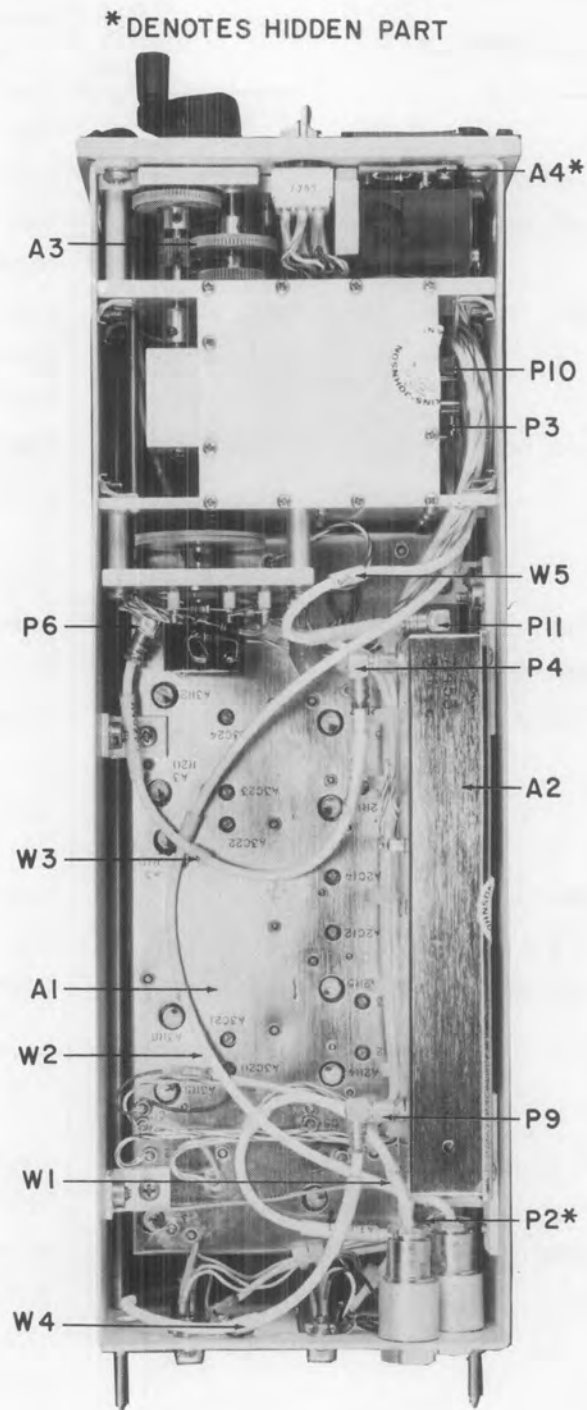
Type VH-107 Tuning Head, Top View, Location of Components
